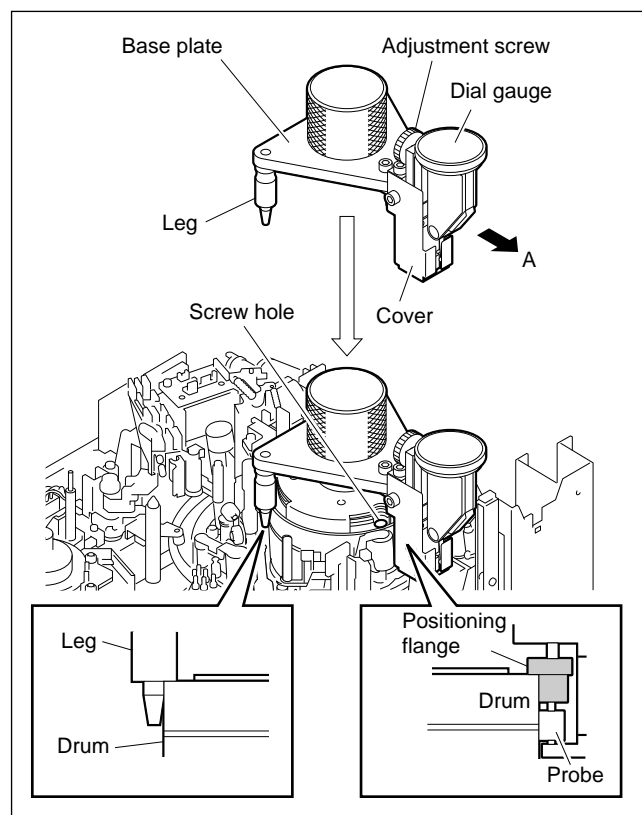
Setting of Head Tip Protrusion Measurement Gauge
